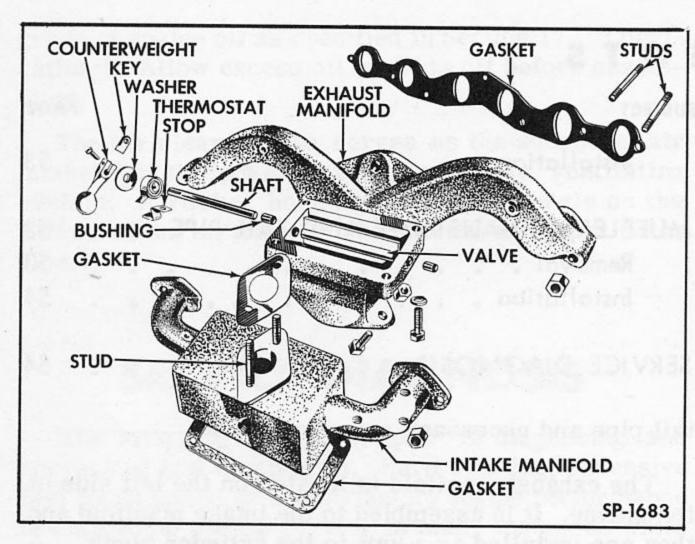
Exhaust and Intake Manifolds—4 Cylinder— Exploded View
